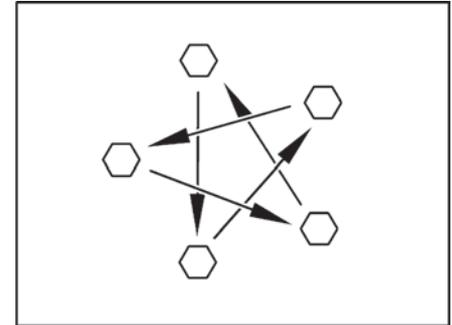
Tighten the wheel nuts or wheel bolts cross-wise
